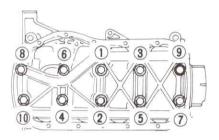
Main bearing cap bolt tightening sequence (Sec 20)
